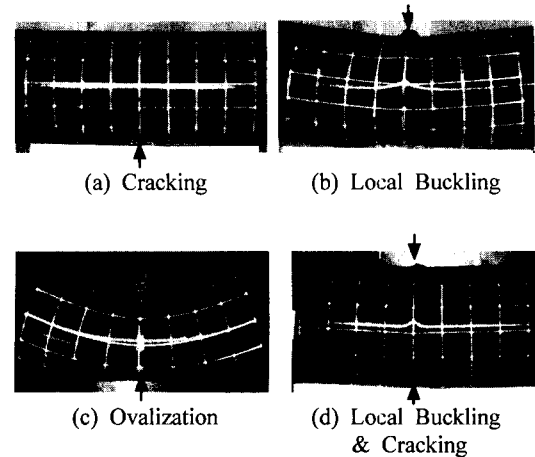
Post-test photographs of test section of wall thinned pipe specimens
